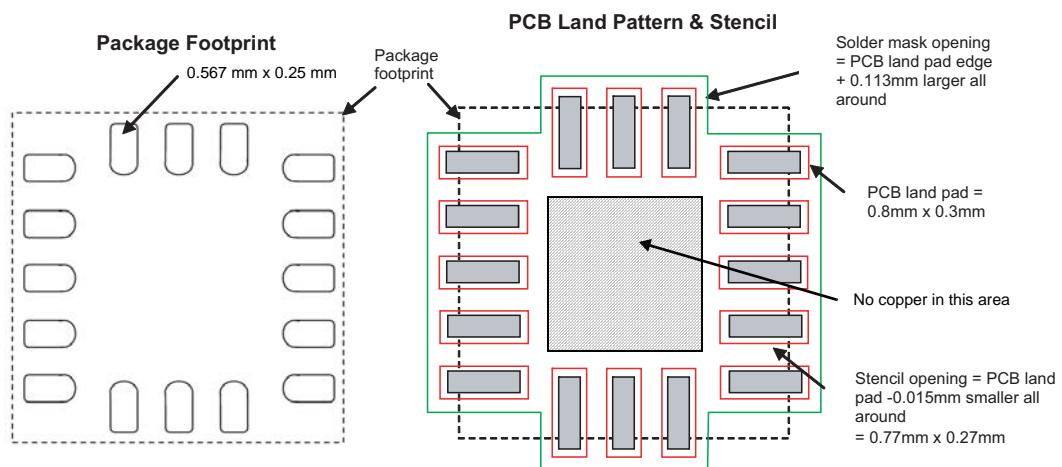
Recommended PCB land pattern, solder mask, and stencil opening near package footprint
